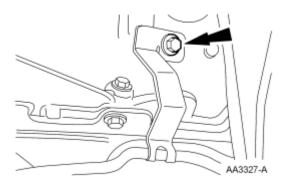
Engine Wiring Harness Retainers Courtesy of FORD MOTOR CO.
